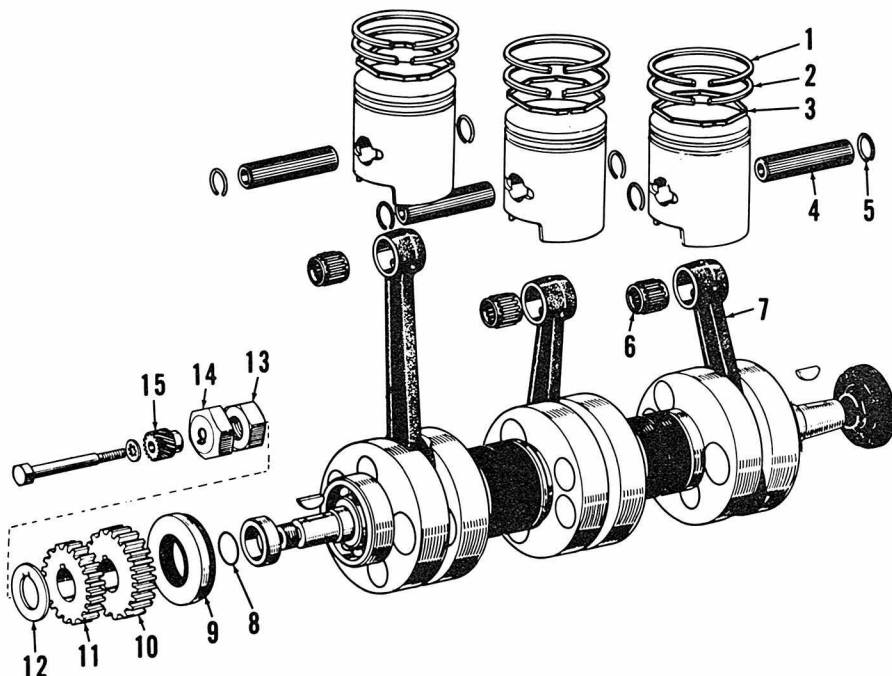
Crankshaft and related parts of Kawasaki H1.
